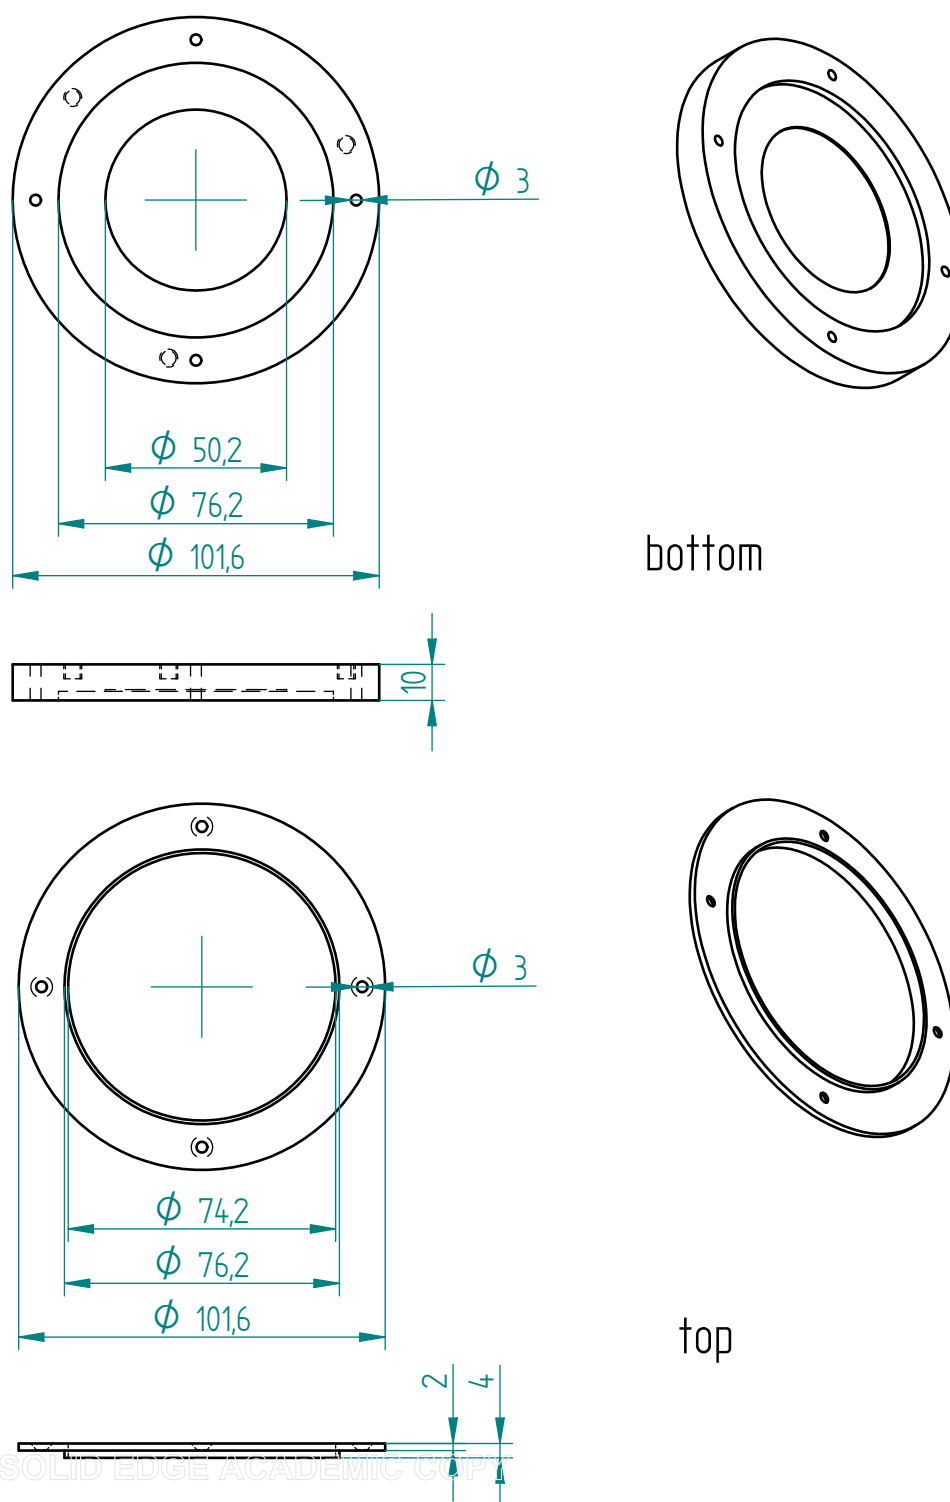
Technical drawings of the stainless steel window flanges of the boiling chamber and the top and bottom lid of the condenser.
